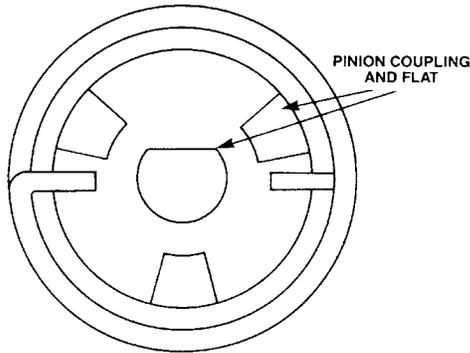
A. Brake, Spring, Motor and Pinion Coupling Alignment
